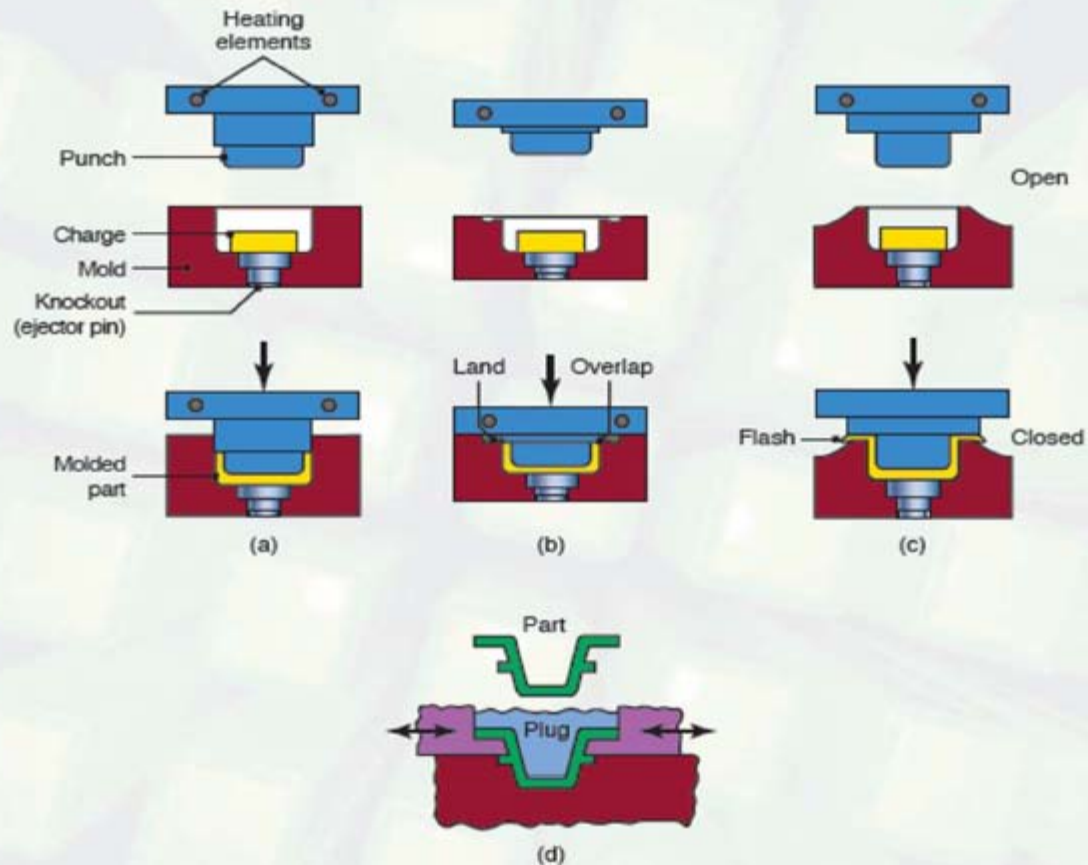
Types of compression molding, a process similar to forging: (a) positive, (b) semipositive, and (c) flash. The flash in part (c) is trimmed off. (d) Die design for making a compression-molded part with undercuts. Such designs also are used in other molding and shaping operations.
